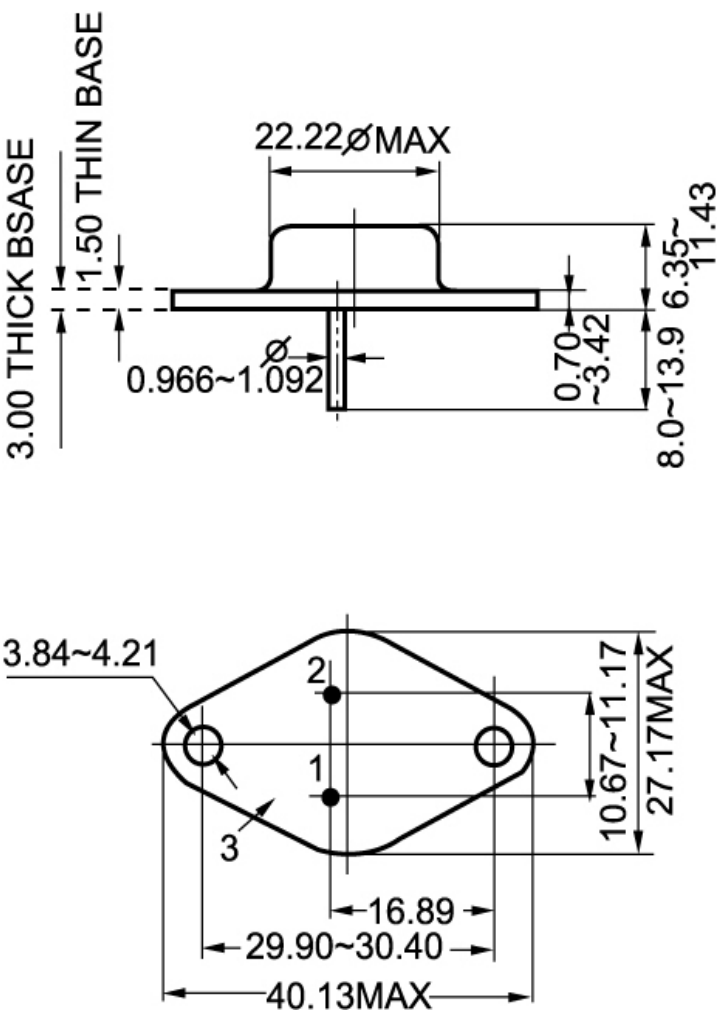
outline dimensions (unindicated tolerance:±0.10mm)
